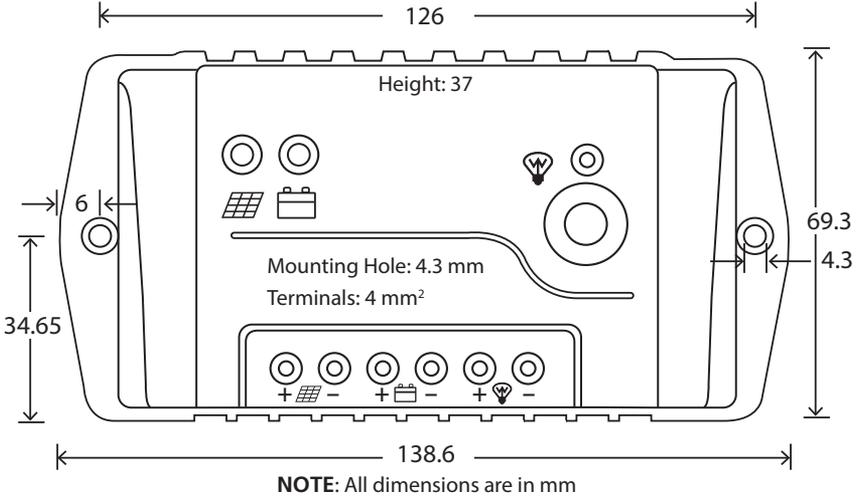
Dimensional Drawing of Charge Controller MSK-10A
